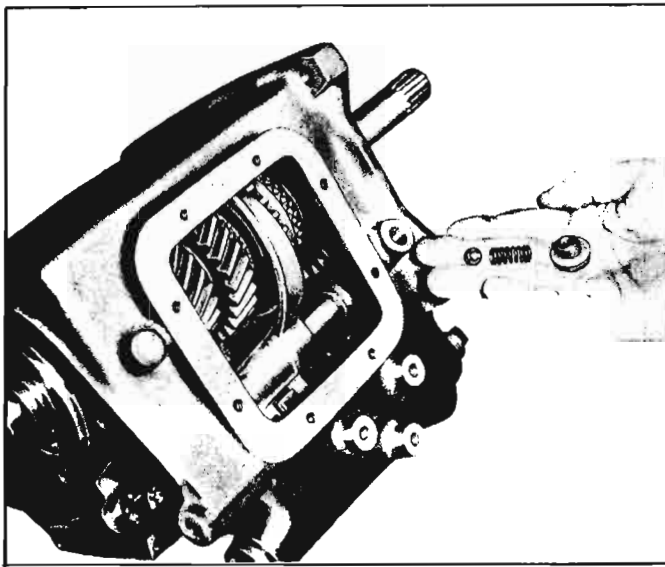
D-30—Removing 3-4 Shift Fork Detent Components
